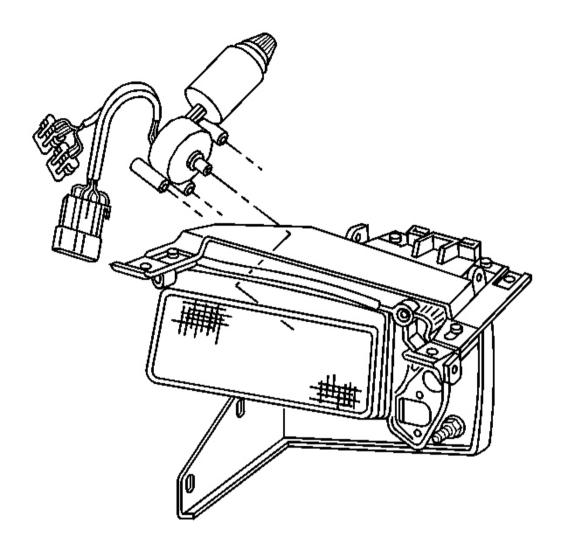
Headlamp Wiring Harness Electrical Connectors To Headlamp Bulb/Sockets Courtesy of GENERAL MOTORS CORP.
